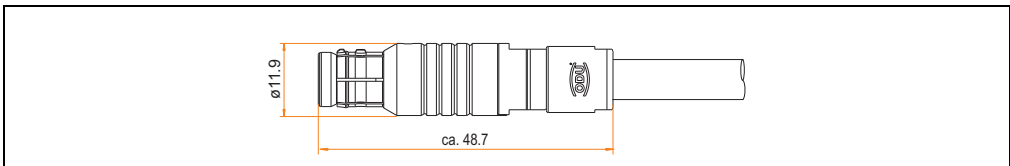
Plug dimensions (ODU Minisnap) - X2X cable 5CAX2X.0xxx-20
